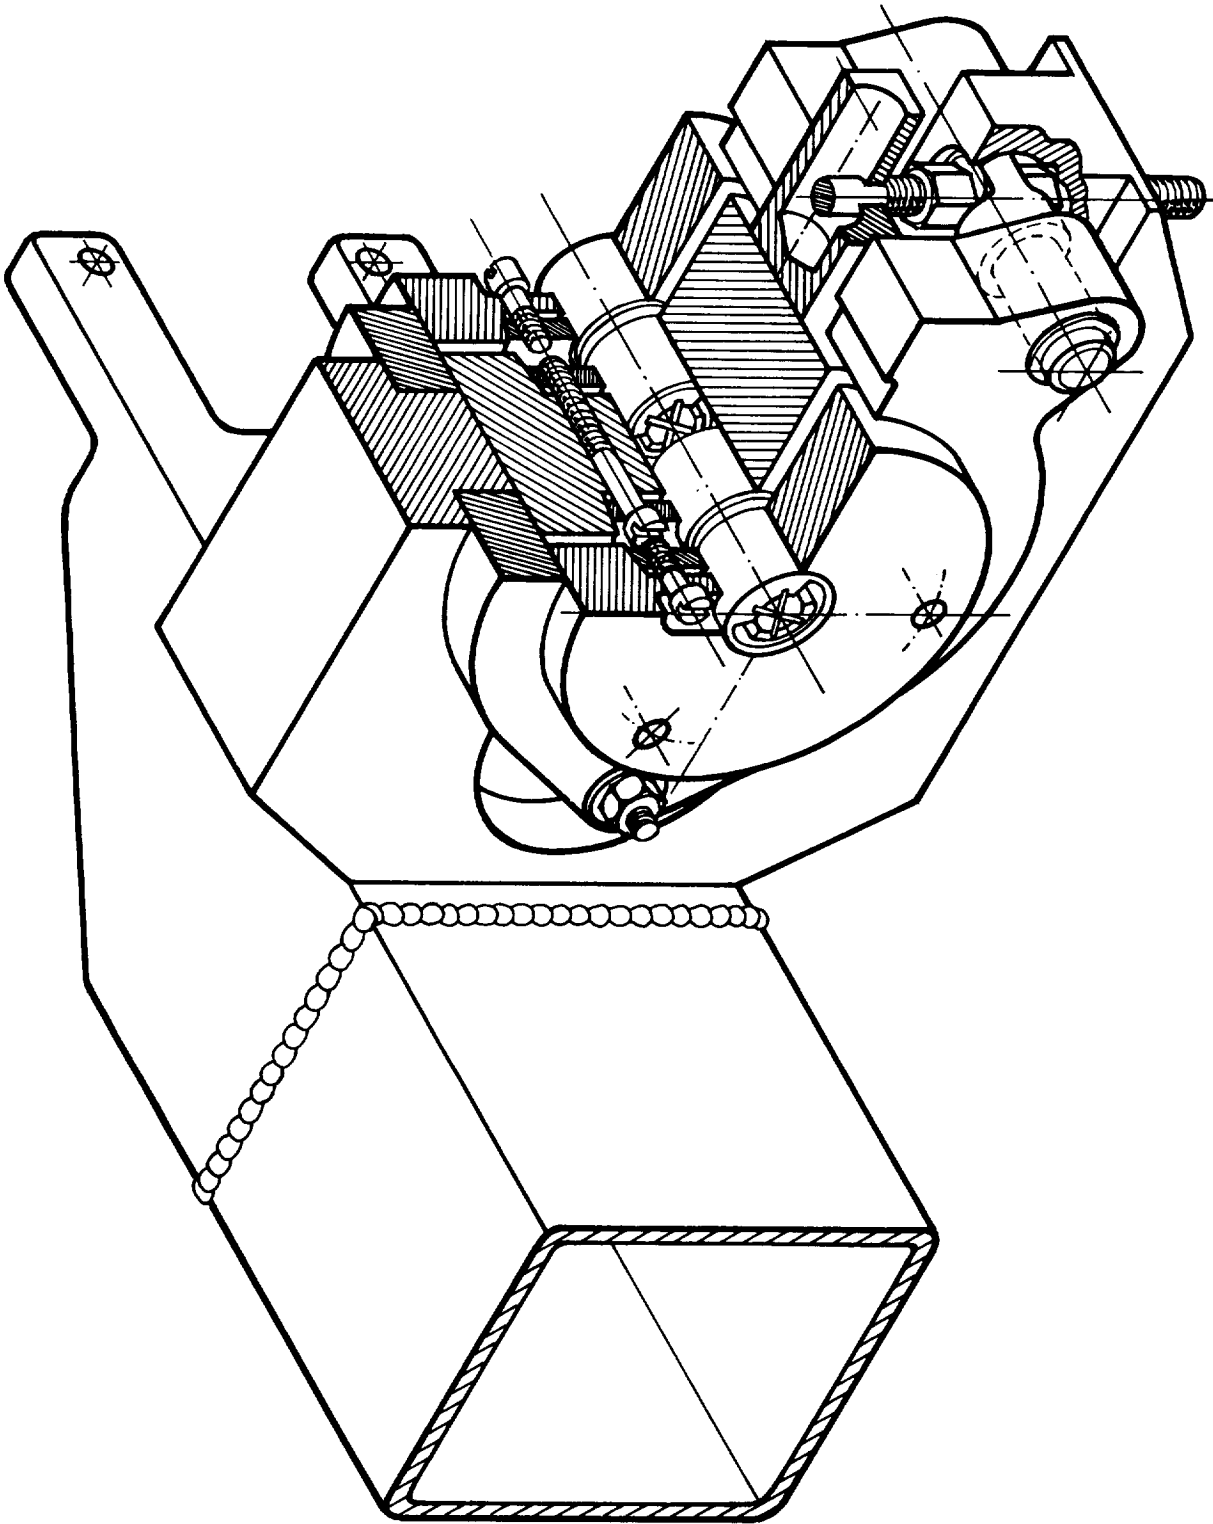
Off-Loading Mechanism. Device to hold the pivots
